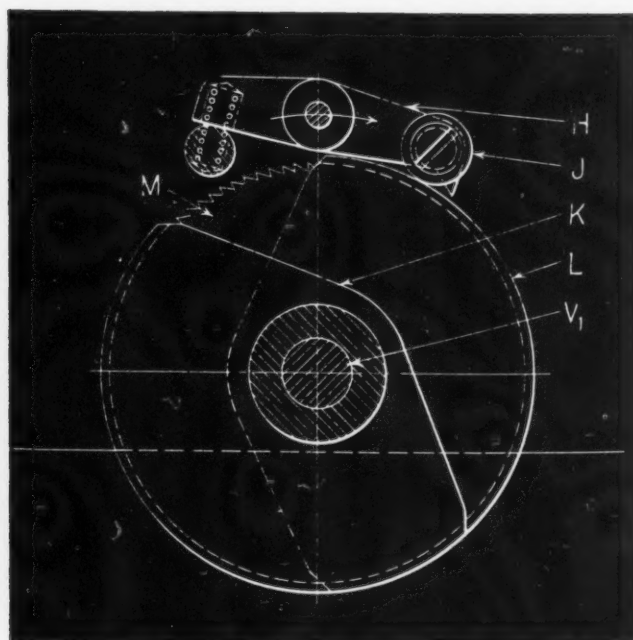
Another View on Section Z-Z, Fig. 2, Showing Relative Positions of Cams K and L for a 12-micron Setting. In This View, Pawl H is Shown Disengaged as Roller J Rides on Cams K and L
